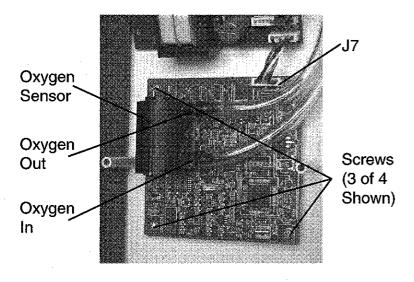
Connections and Mounting Screw Locations on the OPI Board
